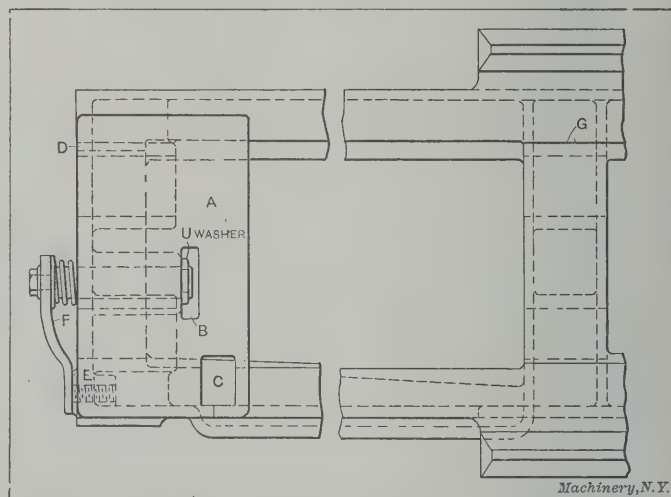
Templet and Gage used when boring the Bed, shown in Position
